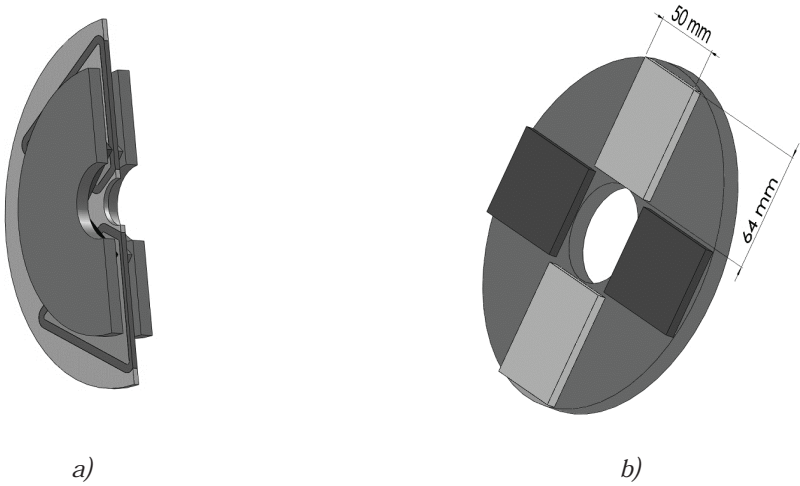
a) Cut view of the complete machine and b) a view of the rotor
